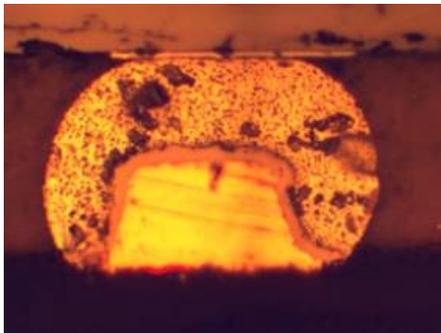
Good Soldering of a Damaged LF1 Bump With Flux Jetting
